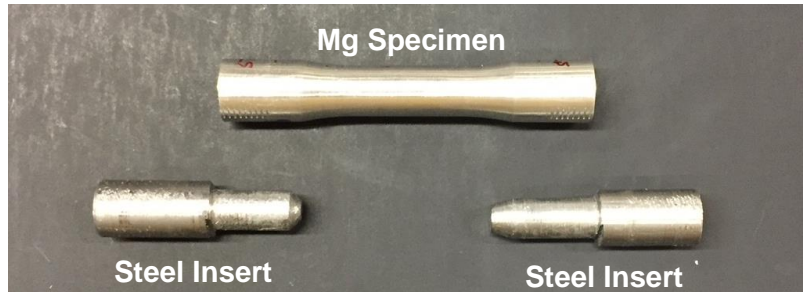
Photograph of the steel inserts used along with the newly developed thin walled tubular specimens.
